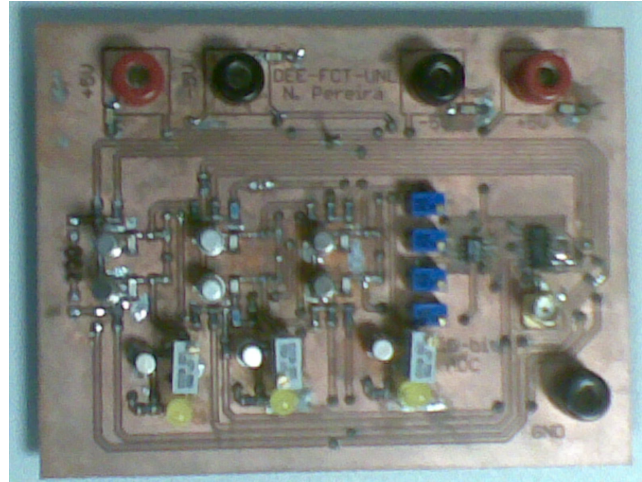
Manufactured 3rd Order 1.5-bit CT- $\Sigma\Delta$ M PCB.
